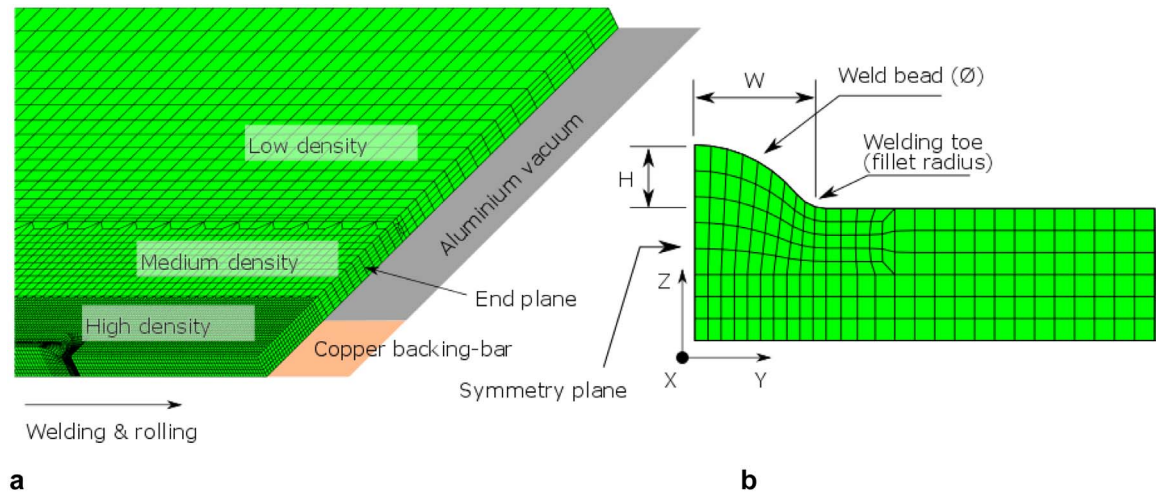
(a) Example of different mesh densities through the plate width; and (b) weld-bead profile.
